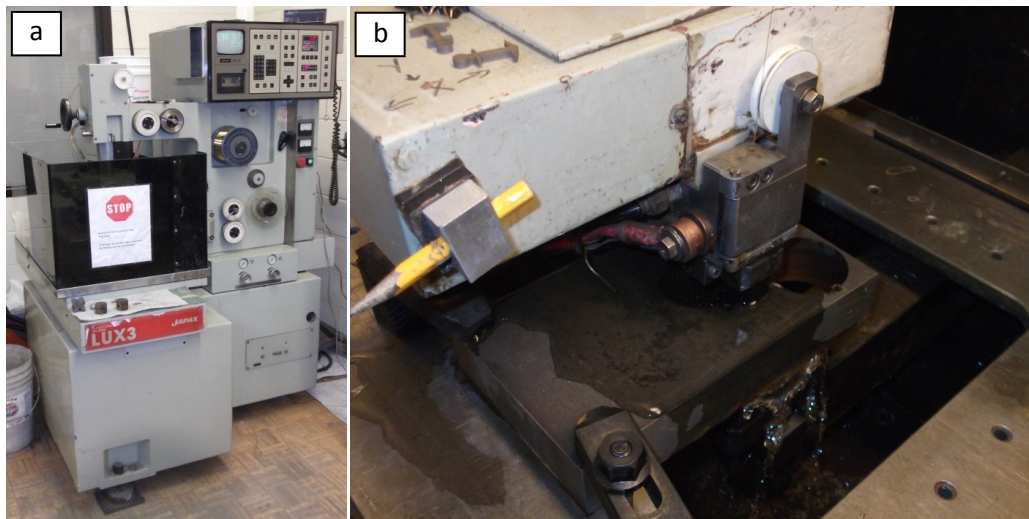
(a) Wire EDM automated machine with (b) close-up of wire cutting process.
